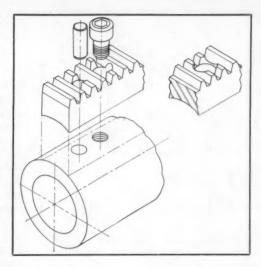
This section drawing shows the manner in which rack teeth can be cut on a cylindrical piece that is hollow.
